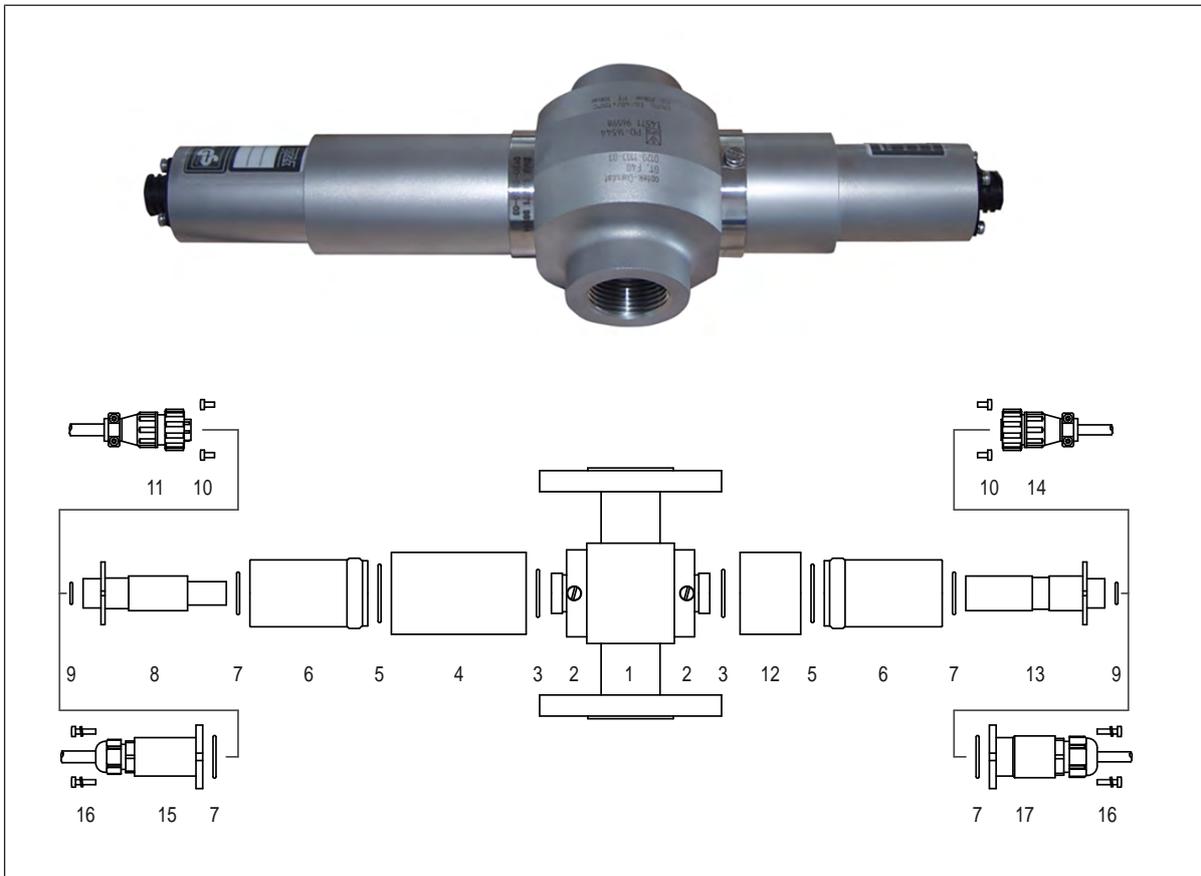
Photo and exploded view of AF16-F / AF16-N
